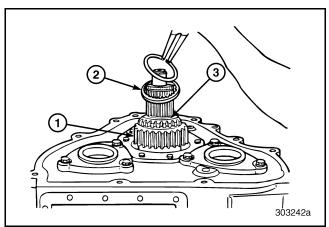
Removing Snap Ring, Thrust Washer and Lo-Split Gear (T313L/T318L Shown)
